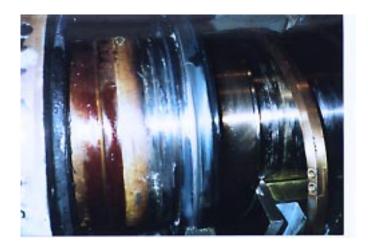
, Slinger Ring Assembly Showing Abnormal Wear
